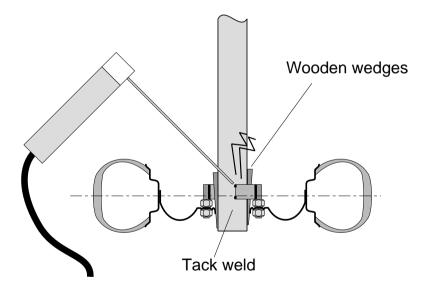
tyre, wheel and axle tube during tack welding stud support struts
